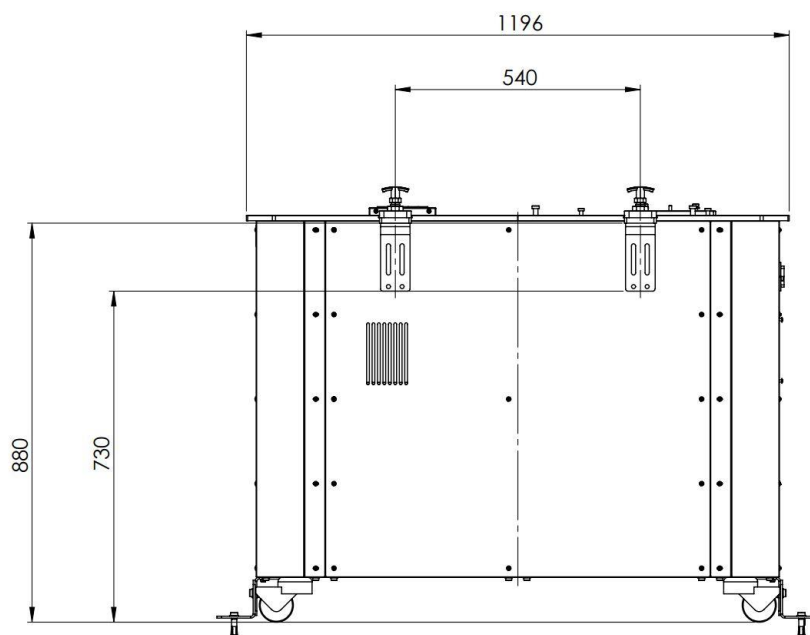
Dimensions mounting device for flange plates and machine flanges MRB M
